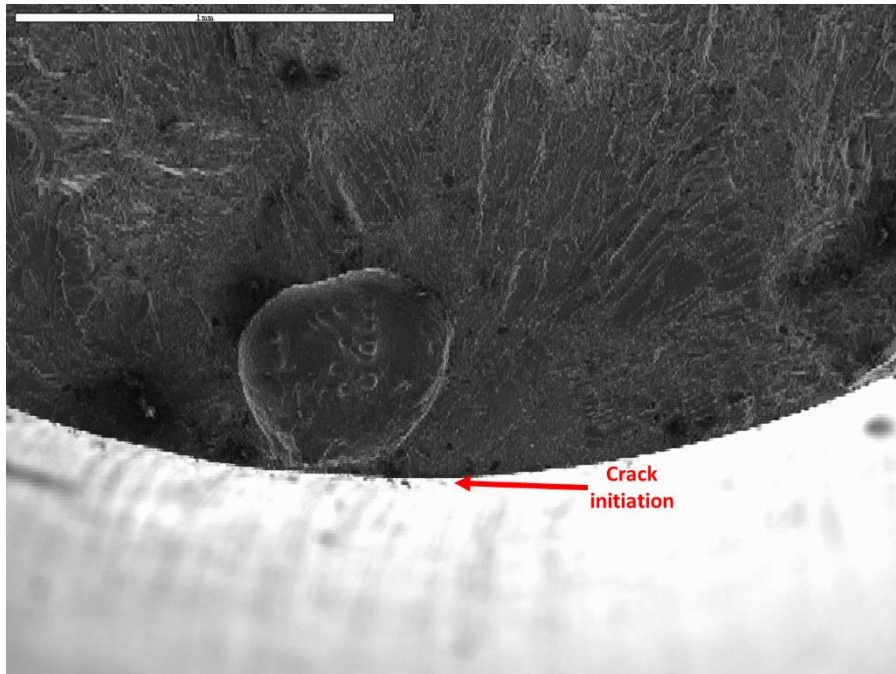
Close-up look at the fatigue initiating pore right below the specimen surface in uniaxial fatigue specimen.
